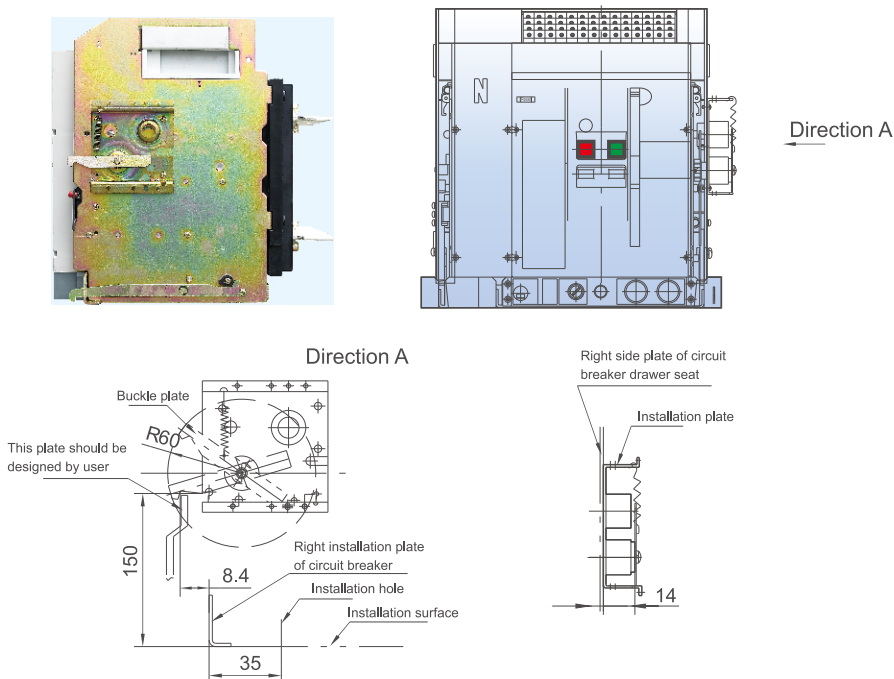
NA8-1600 withdrawable type circuit breaker status door interlock installation dimensions
